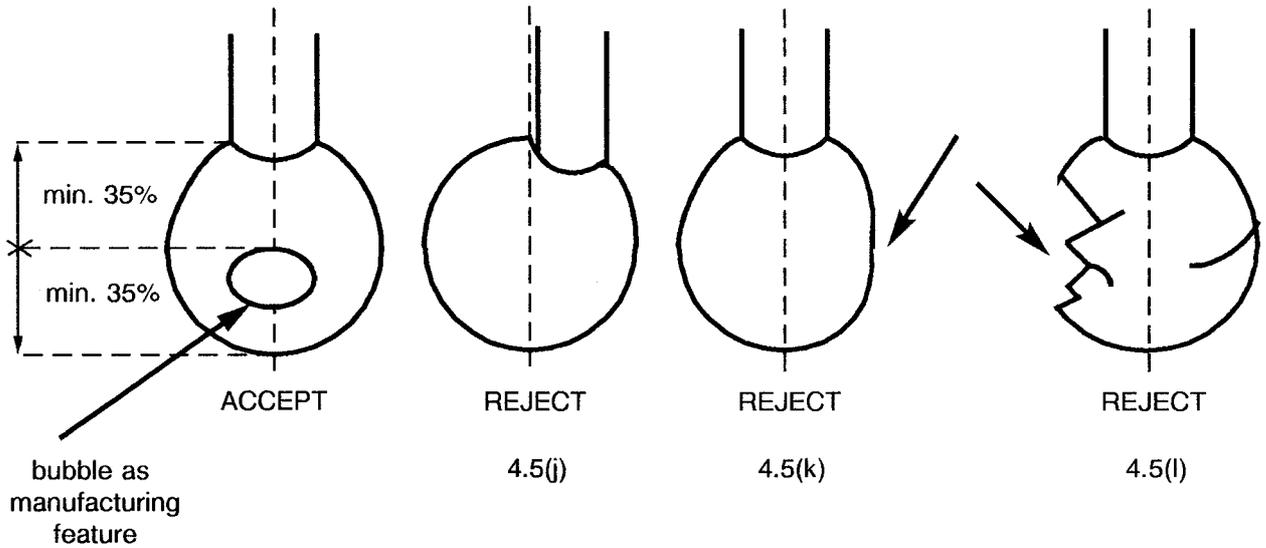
FIGURE X - ACTUATOR/ARMATURE WELD
